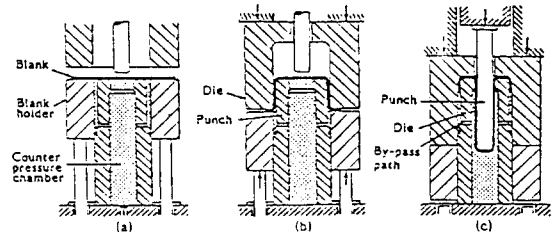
Operational sequence for hydraulic counter-pressure reverse re-drawing assisted by hydraulic force on the edge of the drawn shell : (a), (b) first drawing (conventional drawing) : (c) re-drawing (hydraulic counter-pressure drawing with radial pushing).
